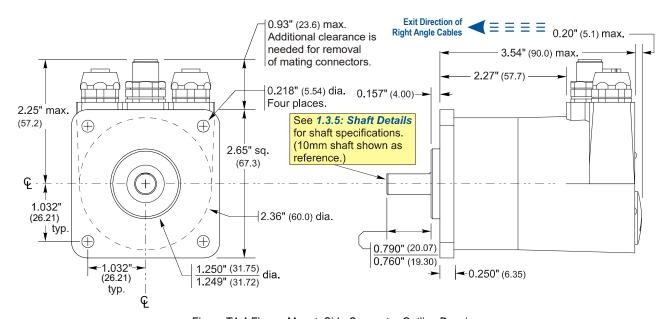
Flange Mount, Side Connector Outline Drawing
